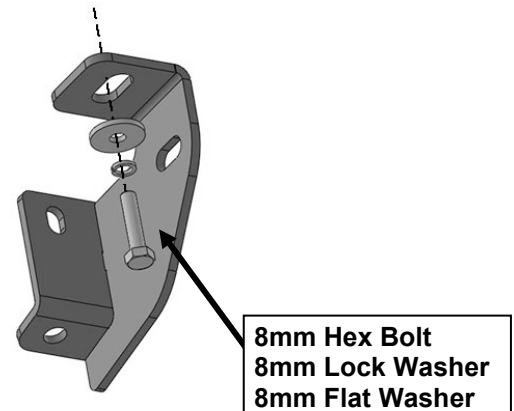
Attach the Driver/Left Front Mounting Bracket to the Nut Plate
